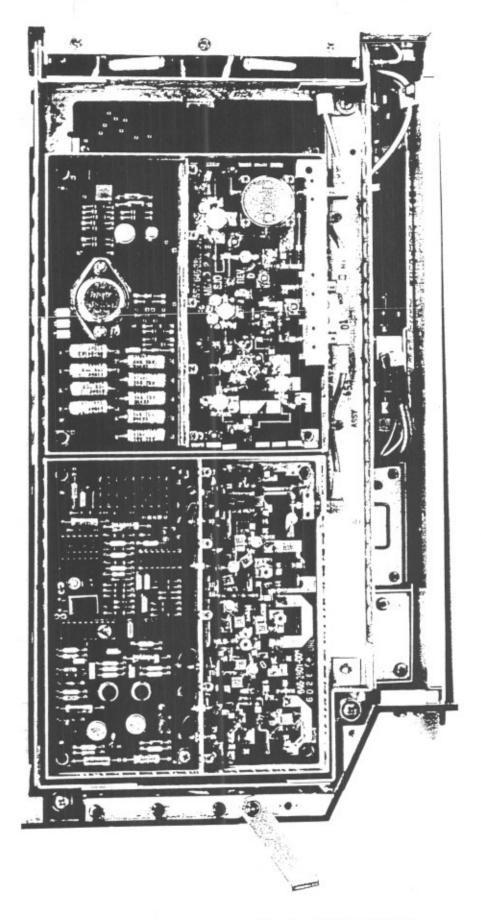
DME-900 Right Side Door Showing SMO and Driver
